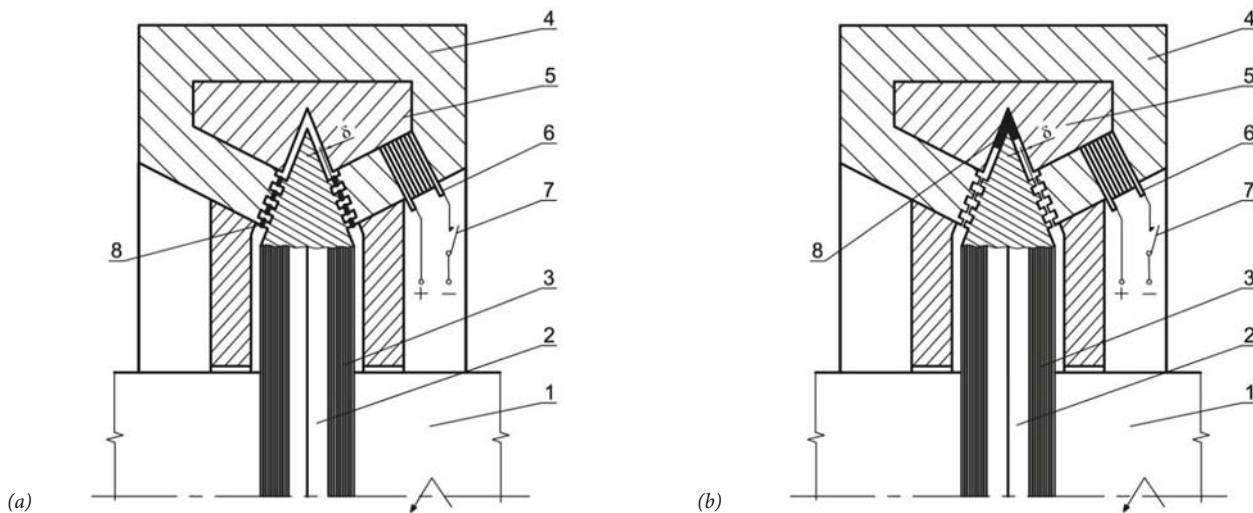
Vee-shaped magnetic/centrifugal fluid seal (a) at low rotating shaft speed, (b) at high rotating shaft speed: 1 - shaft, 2 - disc of vee-shaped cross-section, 3 - projection, 4 - magnetic core, 5 - housing, 6 - electromagnetic coil, 7 - switch, 8 - magnetic fluid, δ - sealing gap
